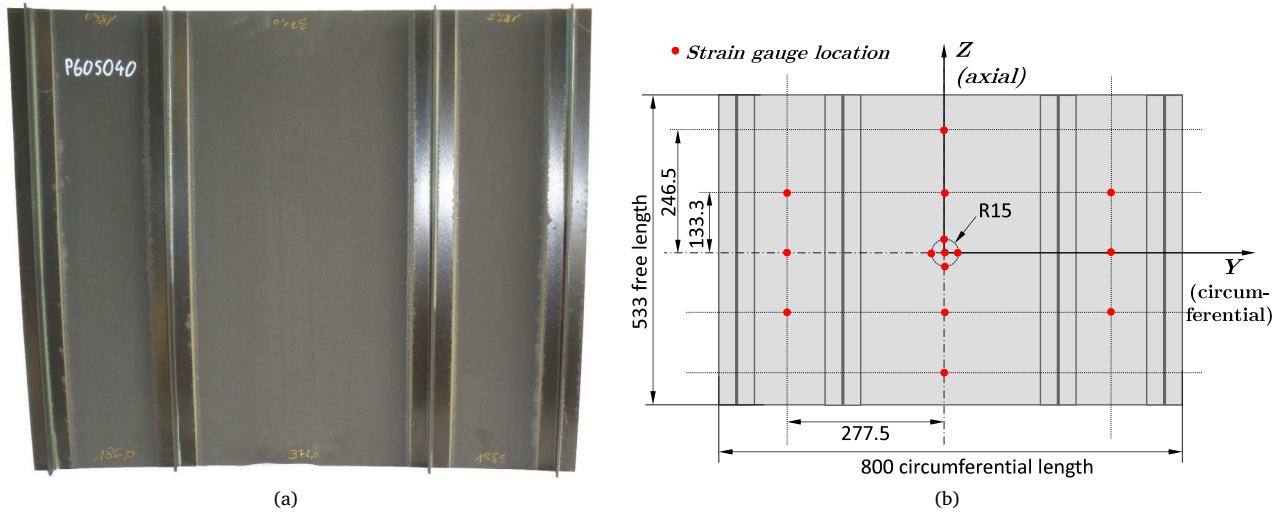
(a) Manufactured 4-stringer CFRP panel specimen for the compression test (b) Technical sketch of the panel showing dimensions and strain gauge positions.
